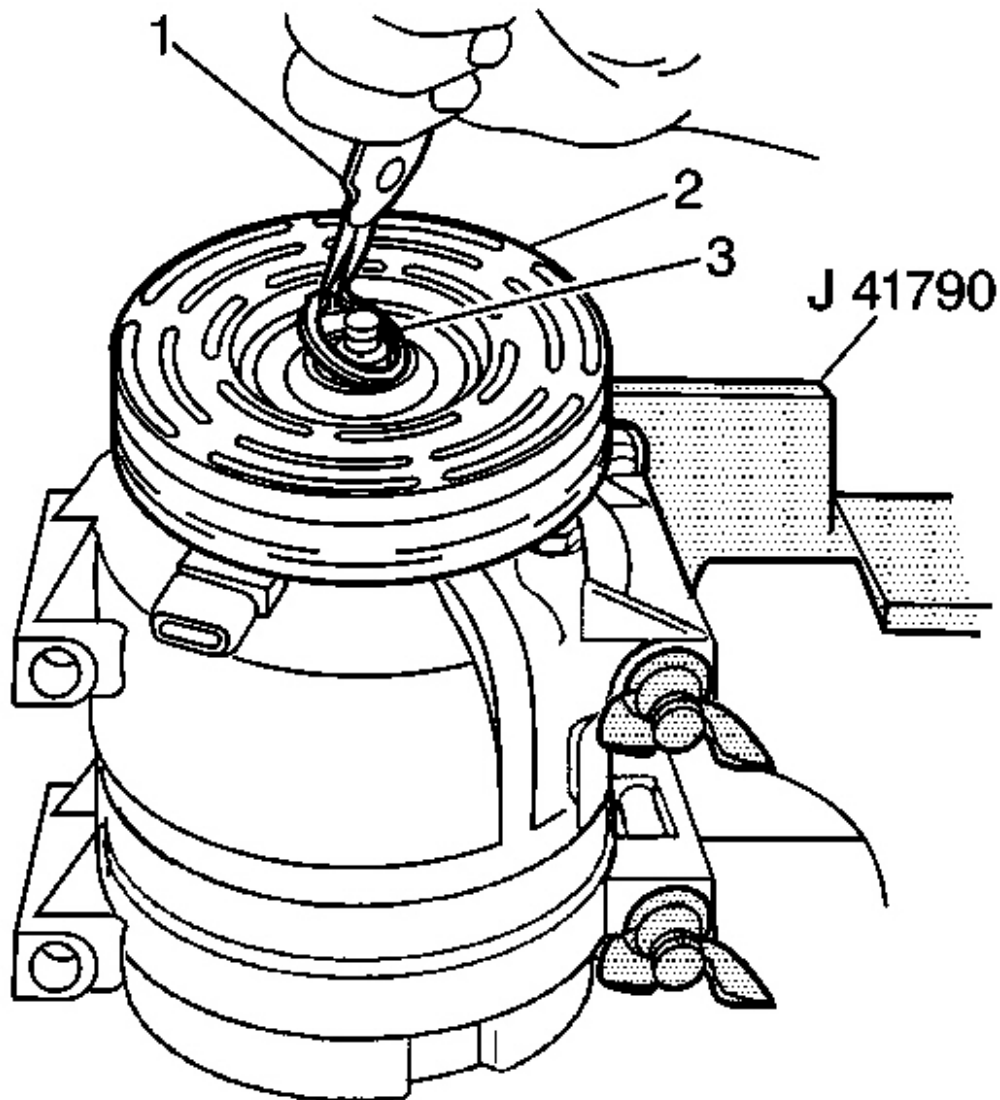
Clutch Rotor, Bearing & J 41790-A
